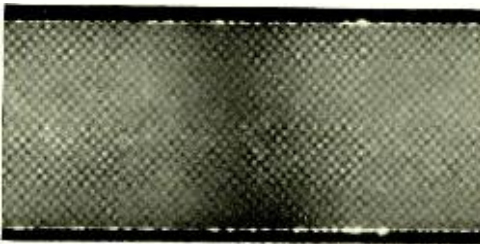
The mottled appearance of this X-ray photograph of a cast metal bar indicates shrinkage cracks in the bar
